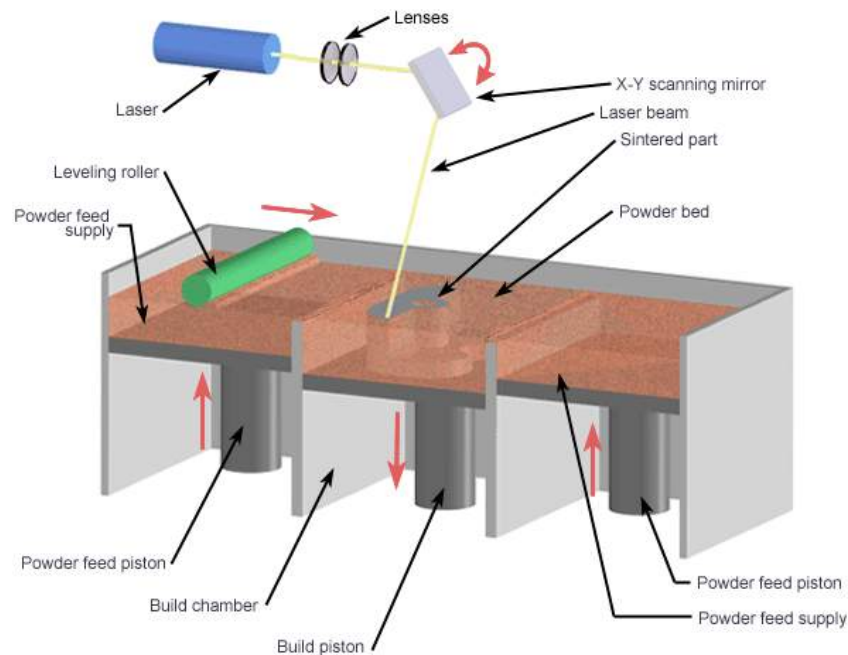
One of the most common Powder Bed Fusion machine: the SLS [37].
